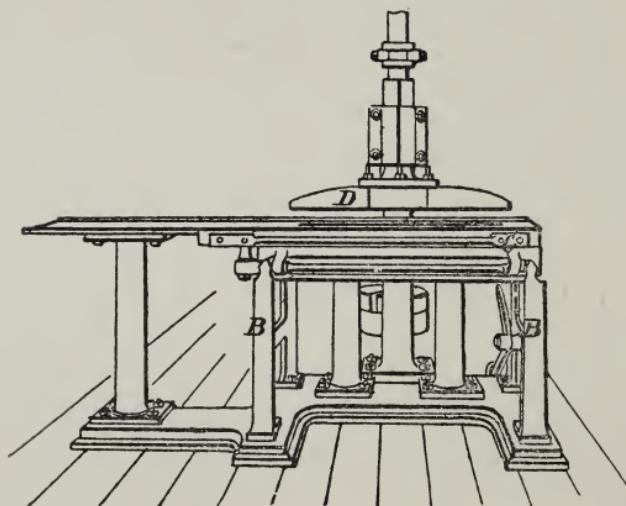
OIL-CAKE MOULDING MACHINE.
